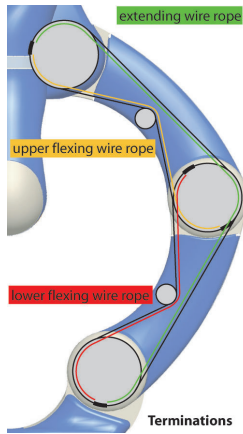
Sketch of the cable actuation of the fourth torso joint.
